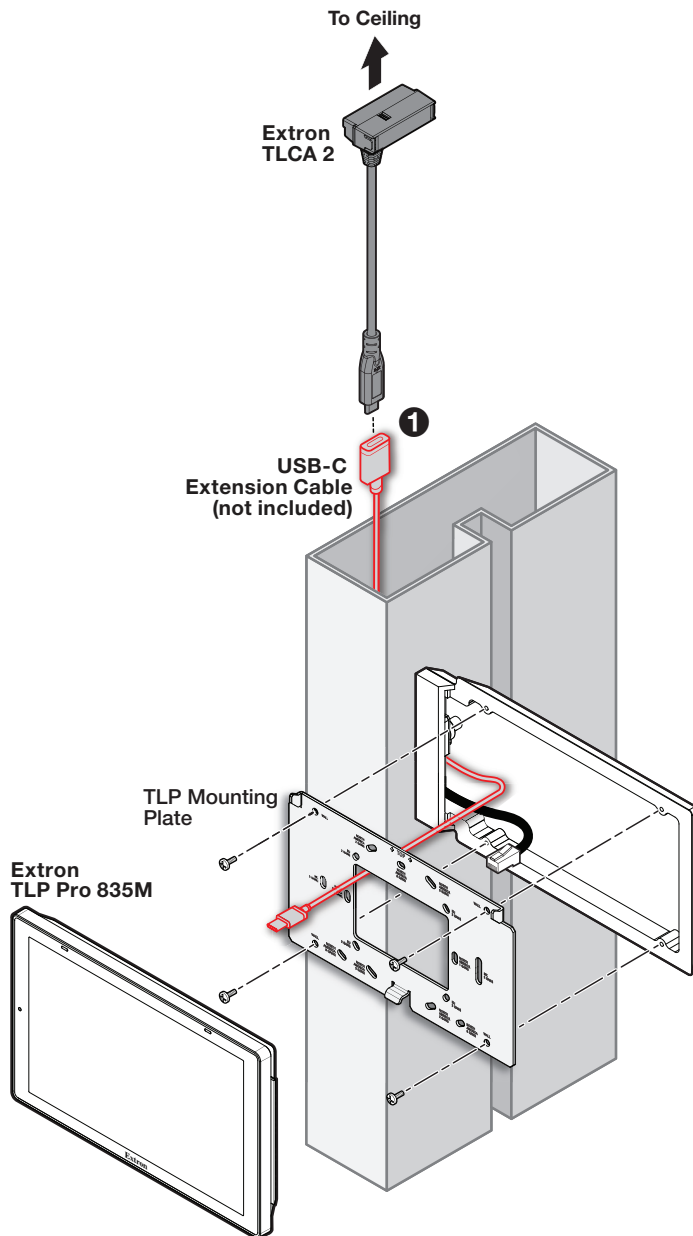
Mounting TLCA 2 to Wall, Glass Wall or Mullion Mount (With USB C Extension Cable)
